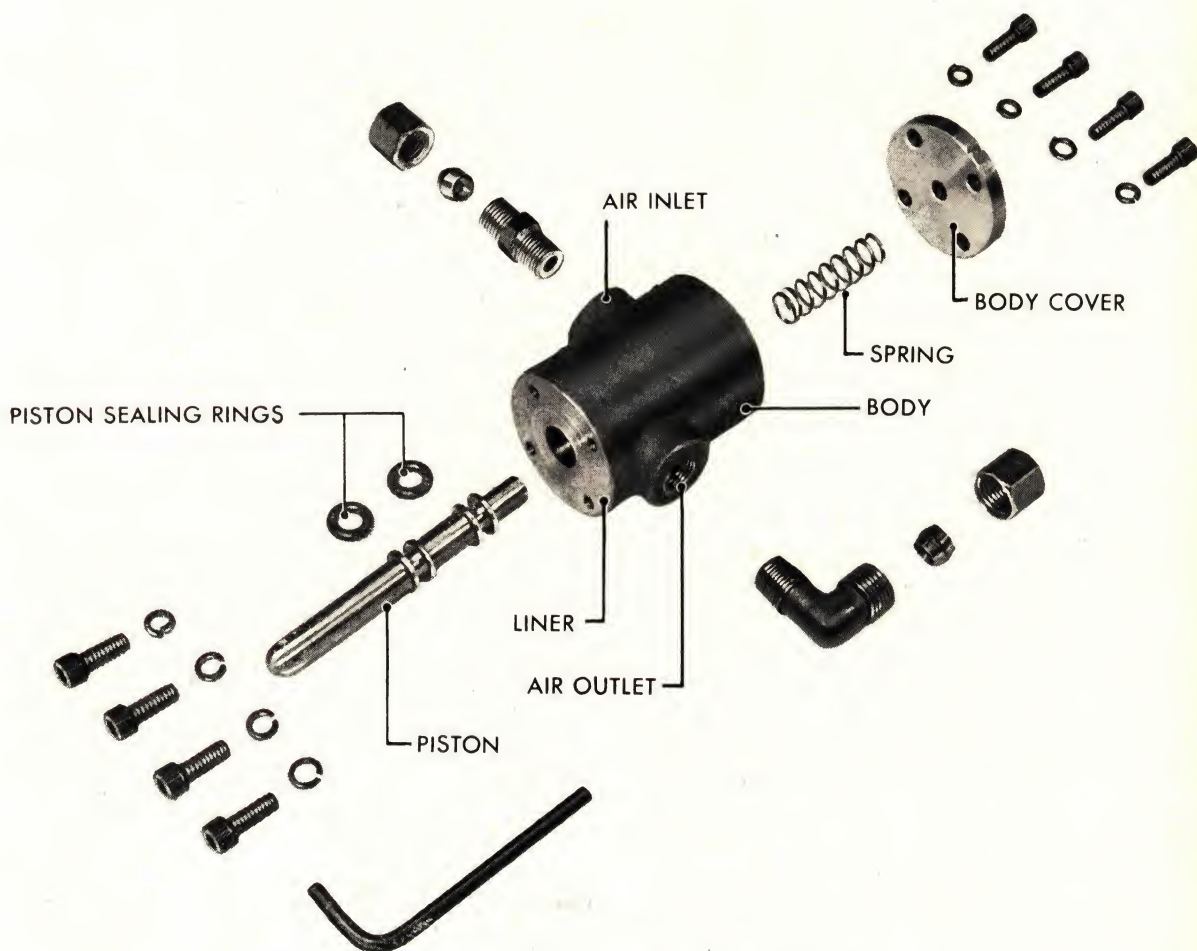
Flame Thrower Mk 1—Gun Pilot Valve Disassembled
